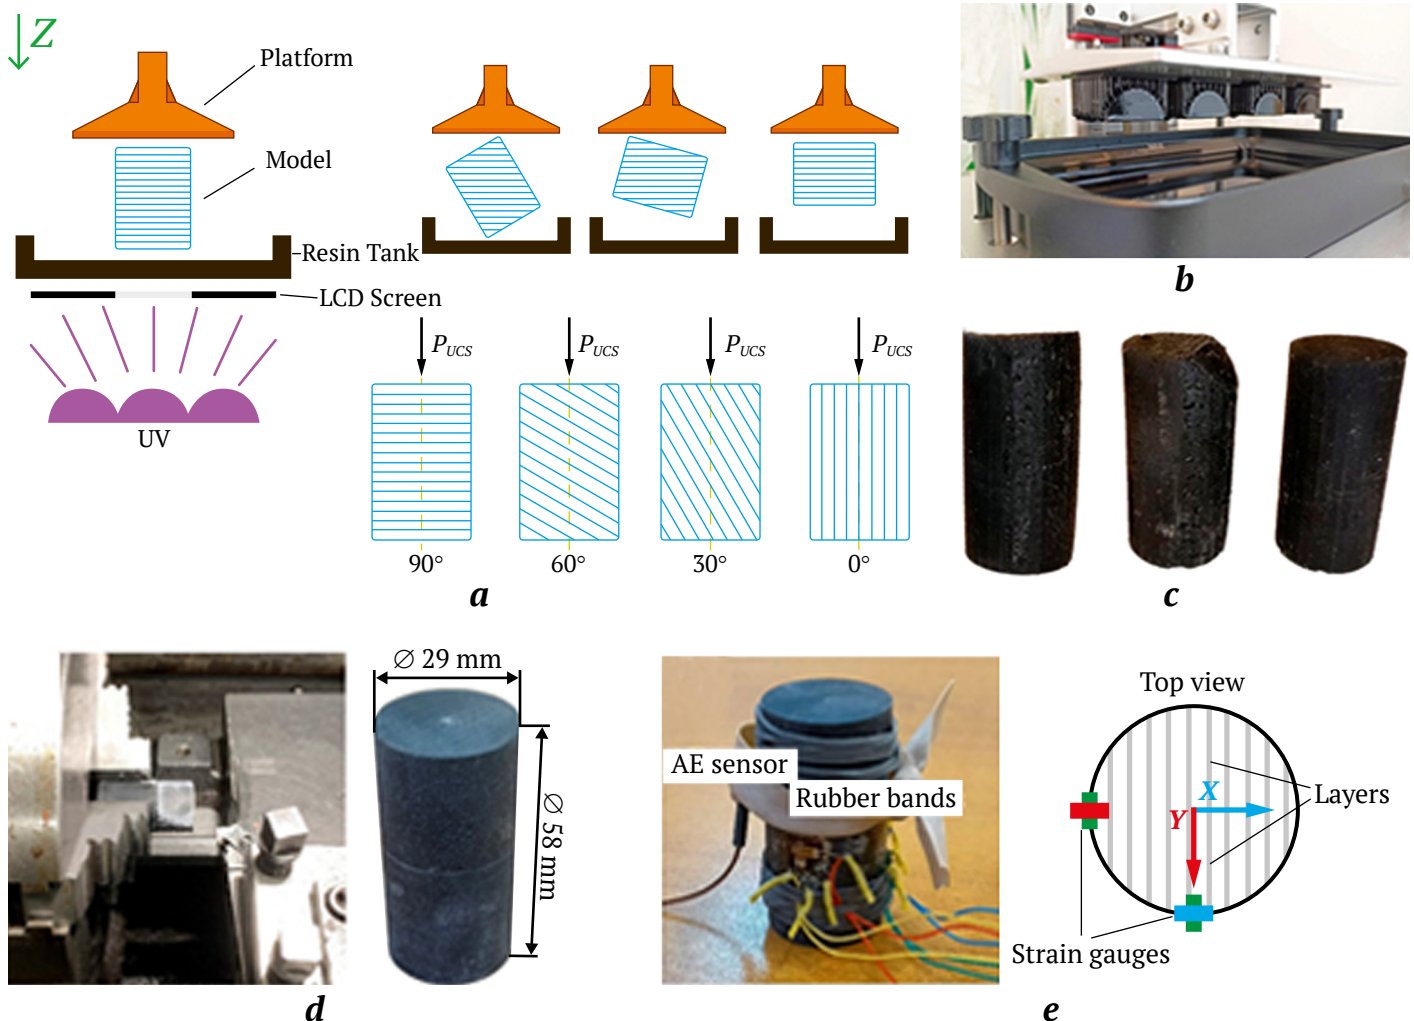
Specimen fabrication: *a* – schematic illustration of specimen printing at different layer orientations; *b* – printing of the specimens; *c* – printed specimens; *d* – specimen machining; *e* – finished specimen fitted with axial and lateral strain gauges and acoustic emission (AE) sensors
